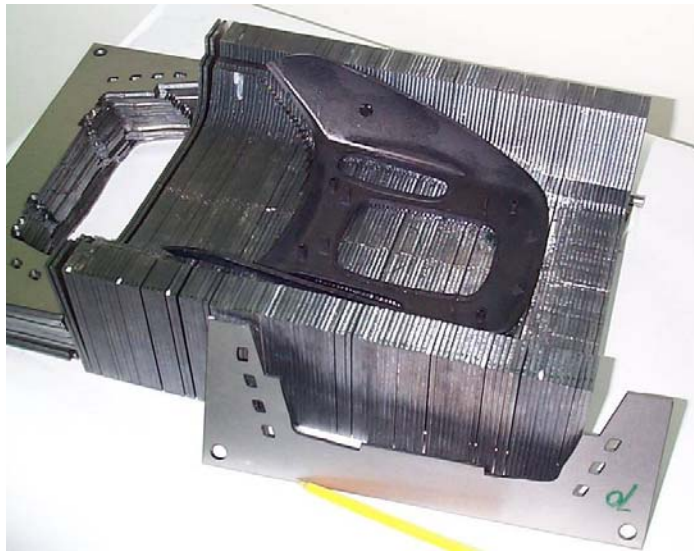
Example of a laminated tool shown in a partially assembled state.
